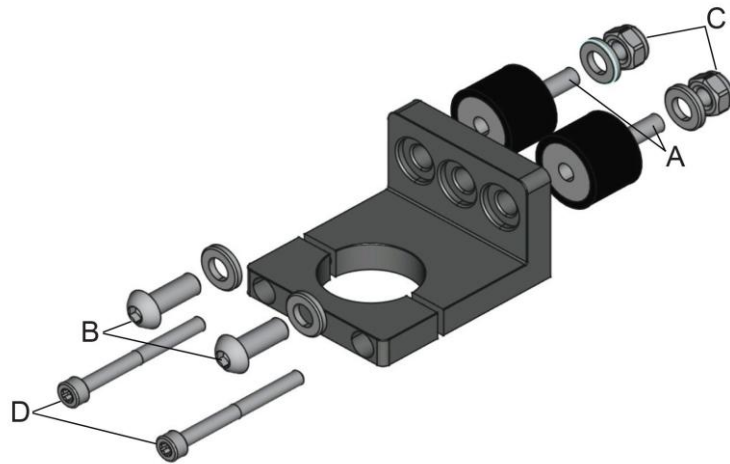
Assembling the Mounting Bracket with Vibration Damping Shock Mounts
